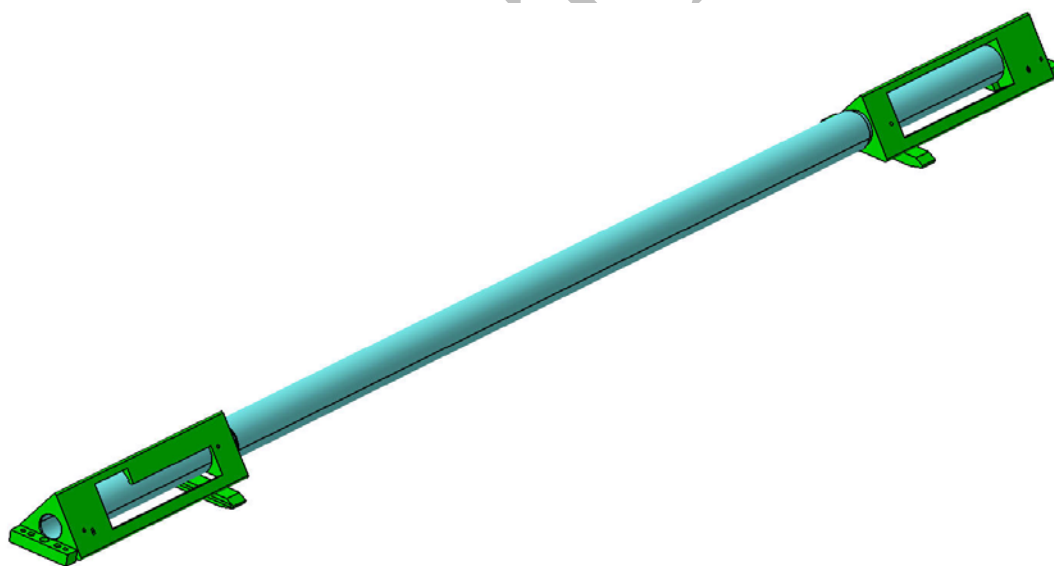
fake ladder (CAD drawing by Gérard Guilloux)
